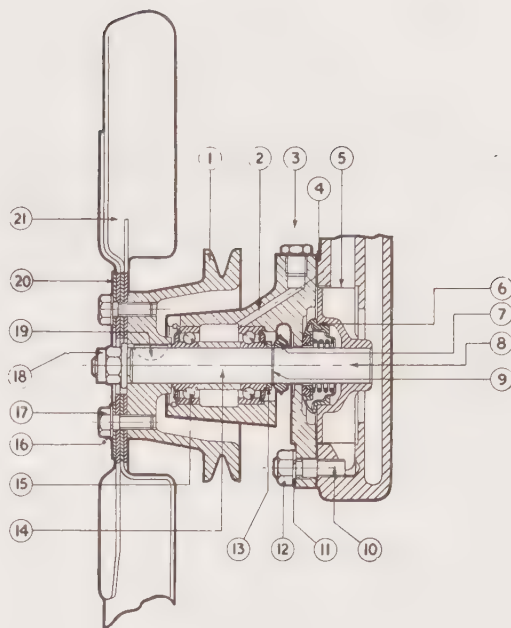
14 Sectional view of water pump. (Fan is not fitted to pump on 6-cylinder engines.)
